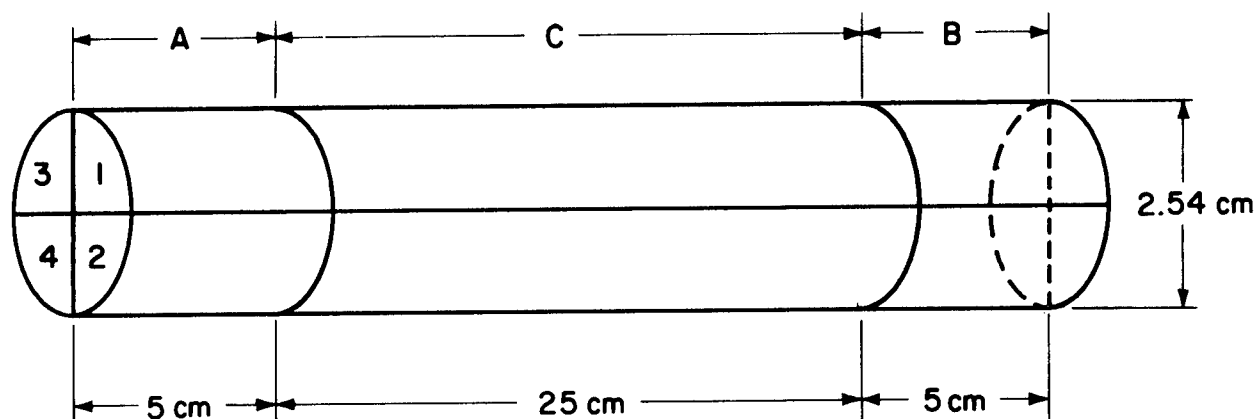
Division of Armco iron rod. Each of the 12 pieces shown was machined into a circular cylinder for measurement.
